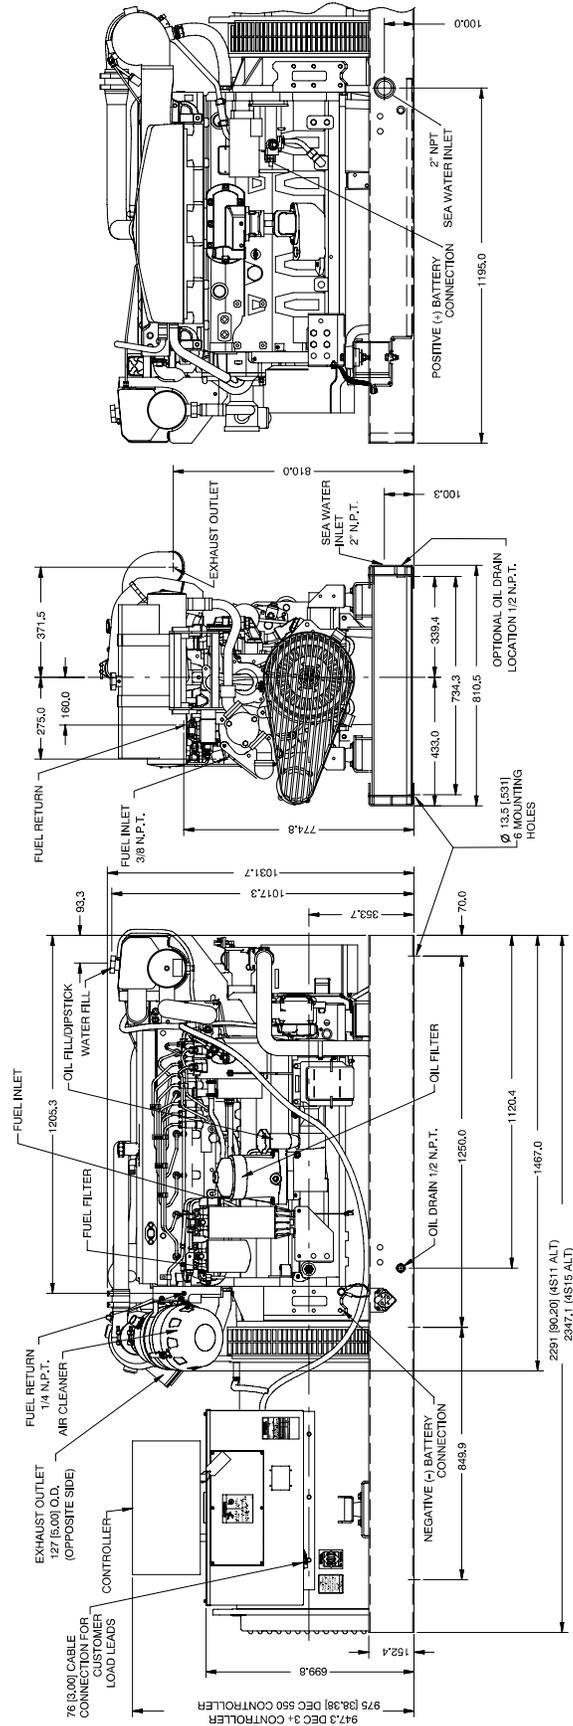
Dimension Drawing, 80/99EOZD and 70/80EFOZD with Keel Cooling
